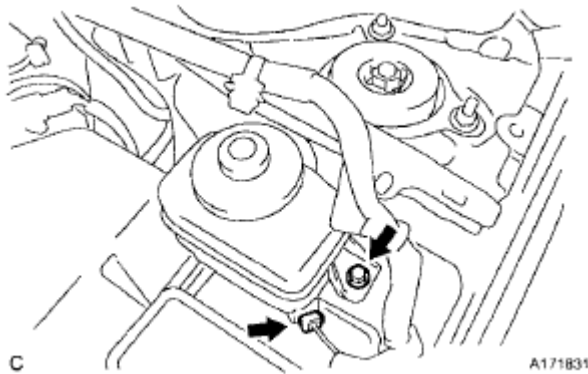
Locating Level Warning Switch Connector And Brake Master Cylinder Reservoir Assembly Bolt
